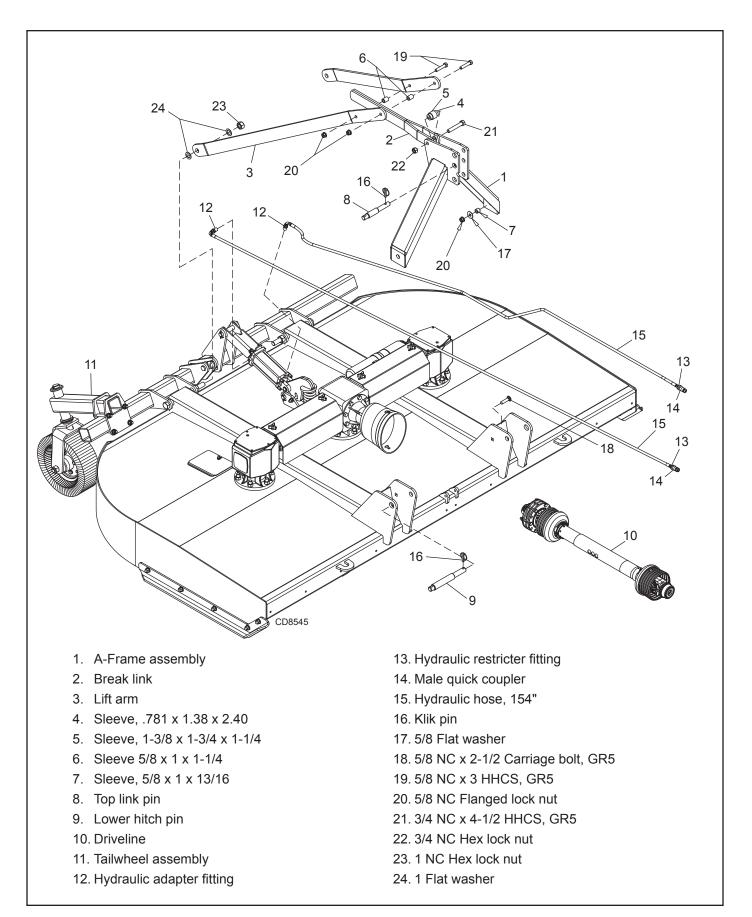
DS8.50 & DS10.50 3-Point Mounted Cutter Assembly
